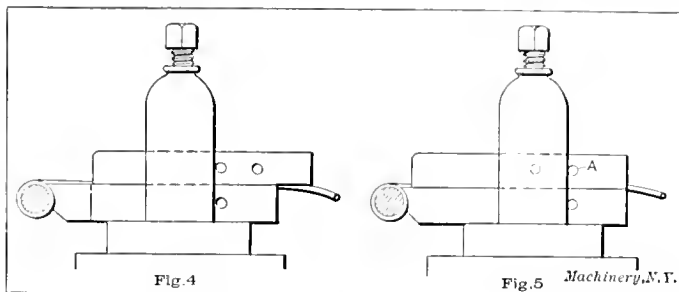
Tool set for Winding Open-coil Springs. Fig. 5. Tool set for Winding Closed Springs
